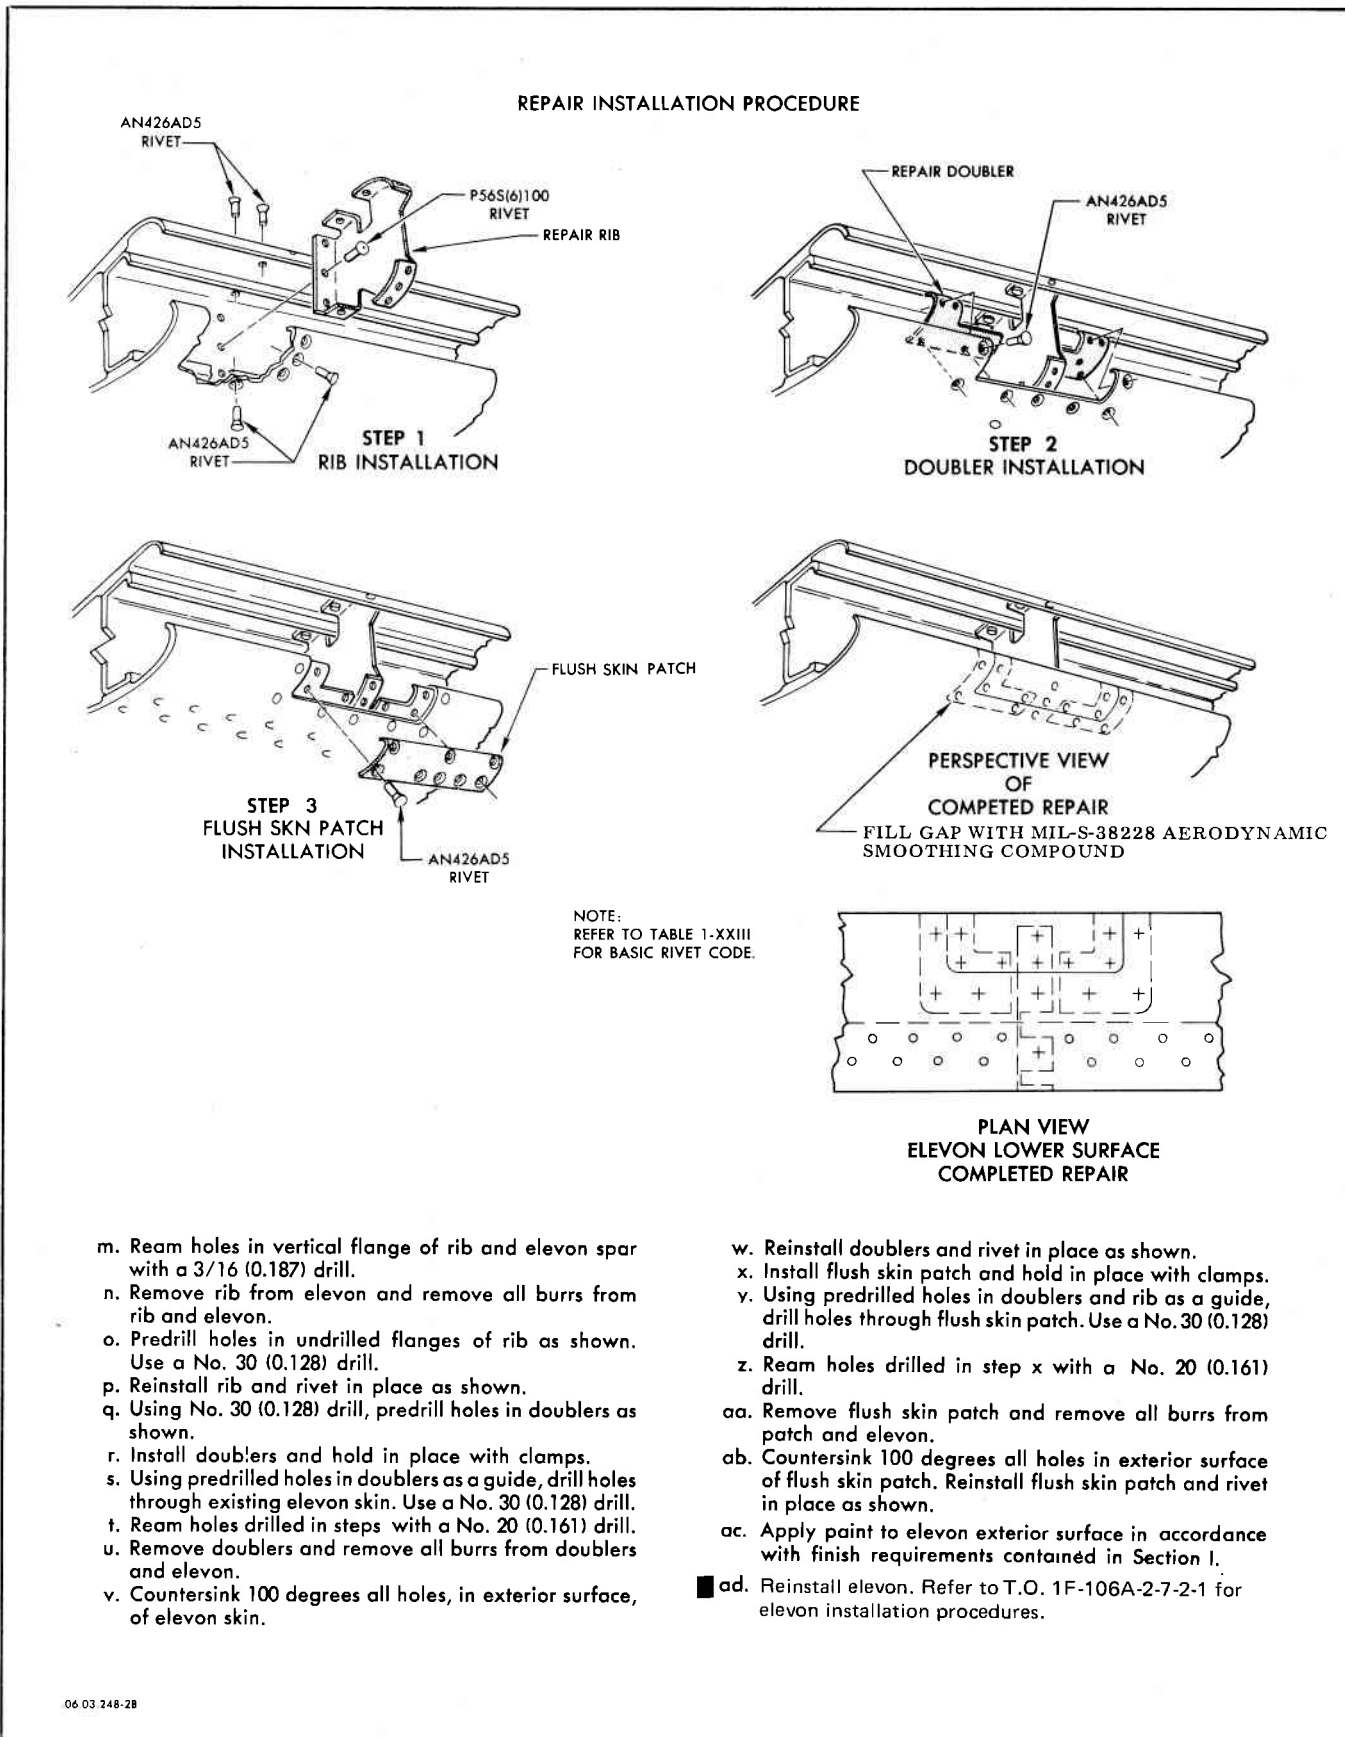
Elevon Leading Edge Repair (Sheet 2 of 2)
